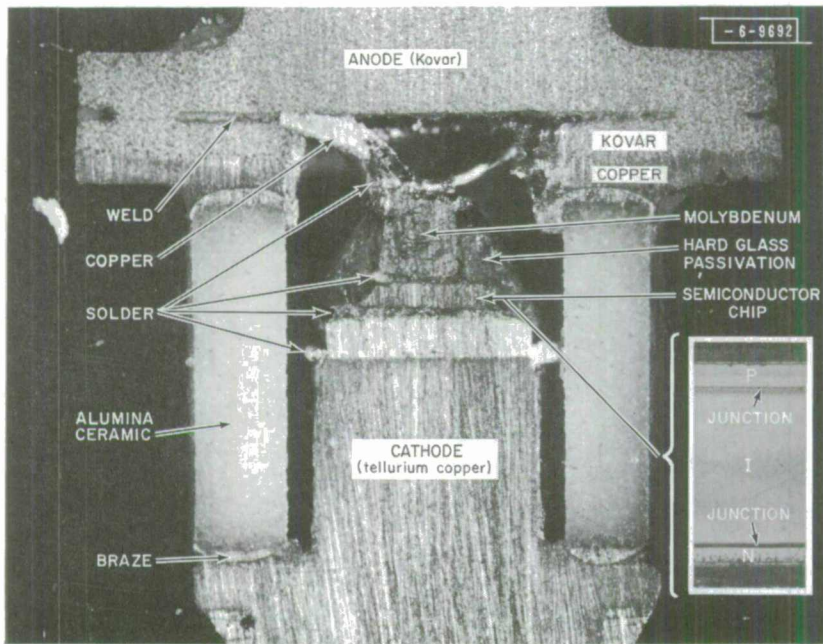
Details of PIN diode. Anode, cathode, copper, and molybdenum parts are gold plated.
